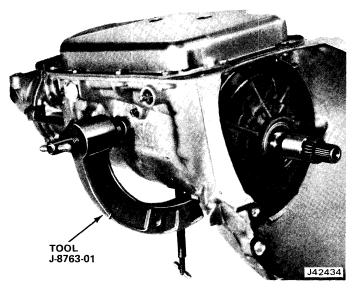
Transmission Mounted in Holding Fixture J-8763-01
